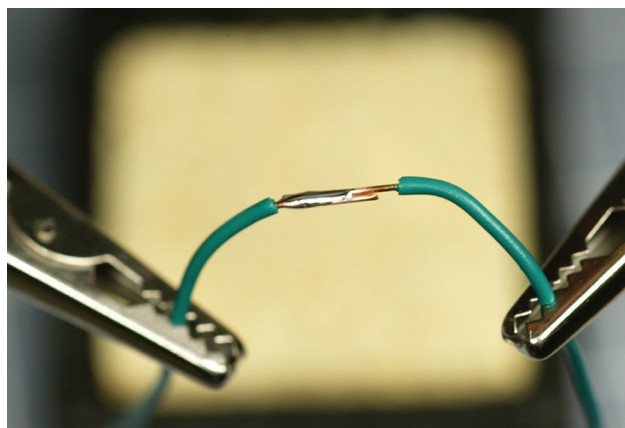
Step 5: The finished joint is shiny, and the solder has spread across the copper surfaces.
